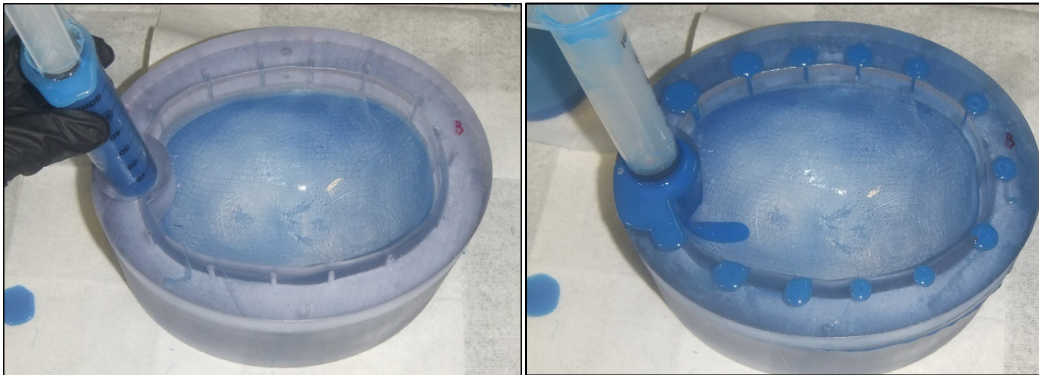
Injection of the “Type 23” elastomer formulation (left). The mold was injected until the vent holes produced overflow material (right).
